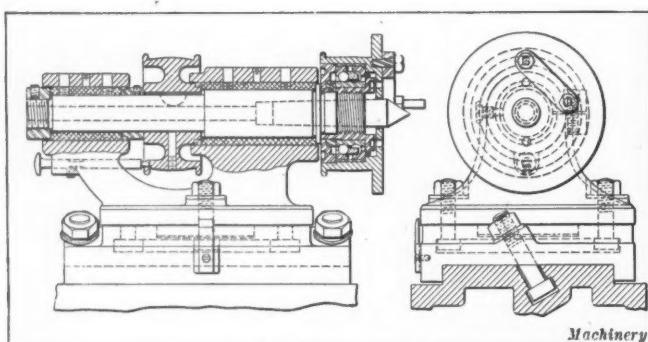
Arrangement of T-bolts for accurately aligning Ball-bearing Tailstock
